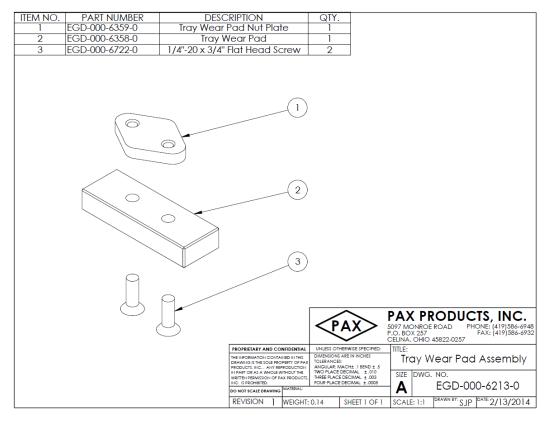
EGD-000-6213 TRAY WEAR PAD ASSEMBLY
